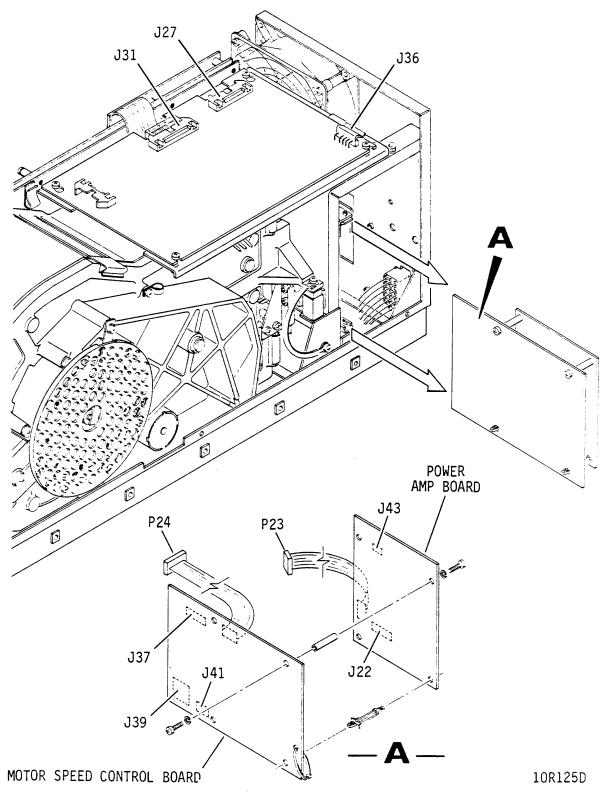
Motor Speed Control Board (_PMX) and Power Amp Board (_QHX) Removal & Replacement
